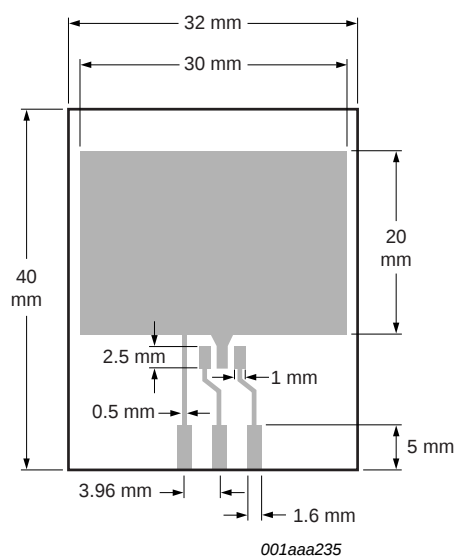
FR4, mounting pad for collector 6 cm<sup>2</sup>.
